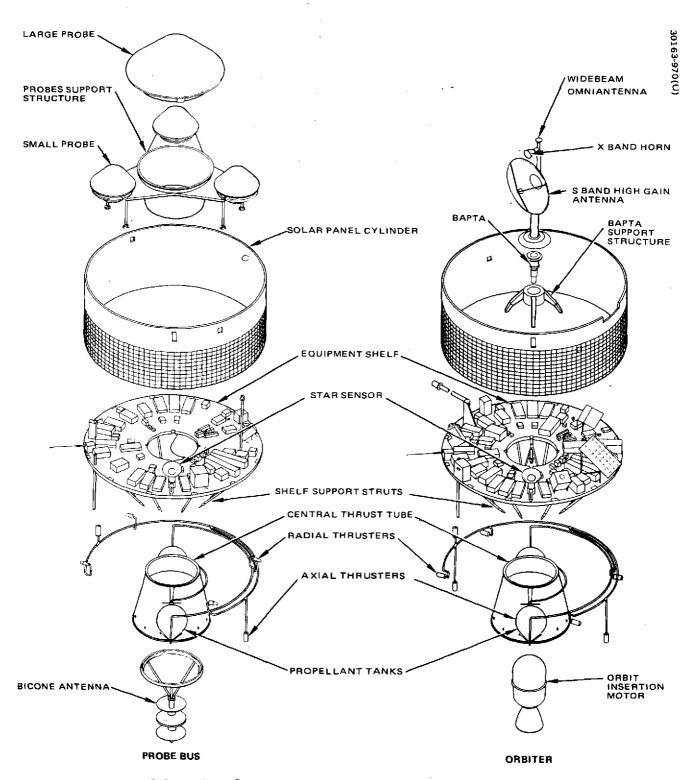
SPACECRAFT CONFIGURATIONS EXPLODED VIEW
